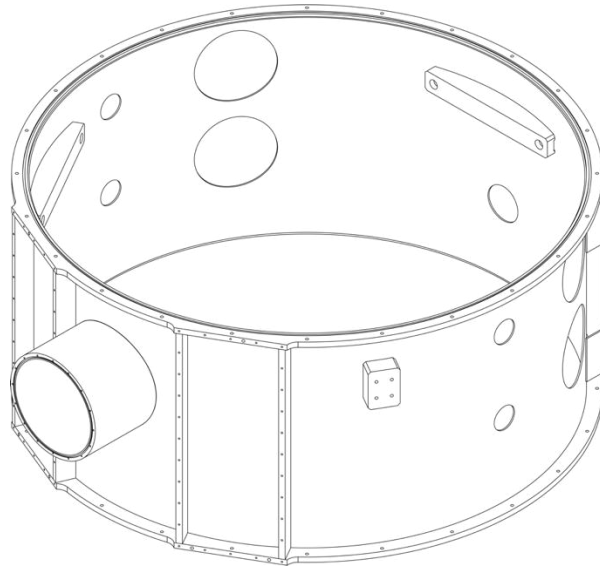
Current cryostat layout with mountings for fixtures and fittings.
